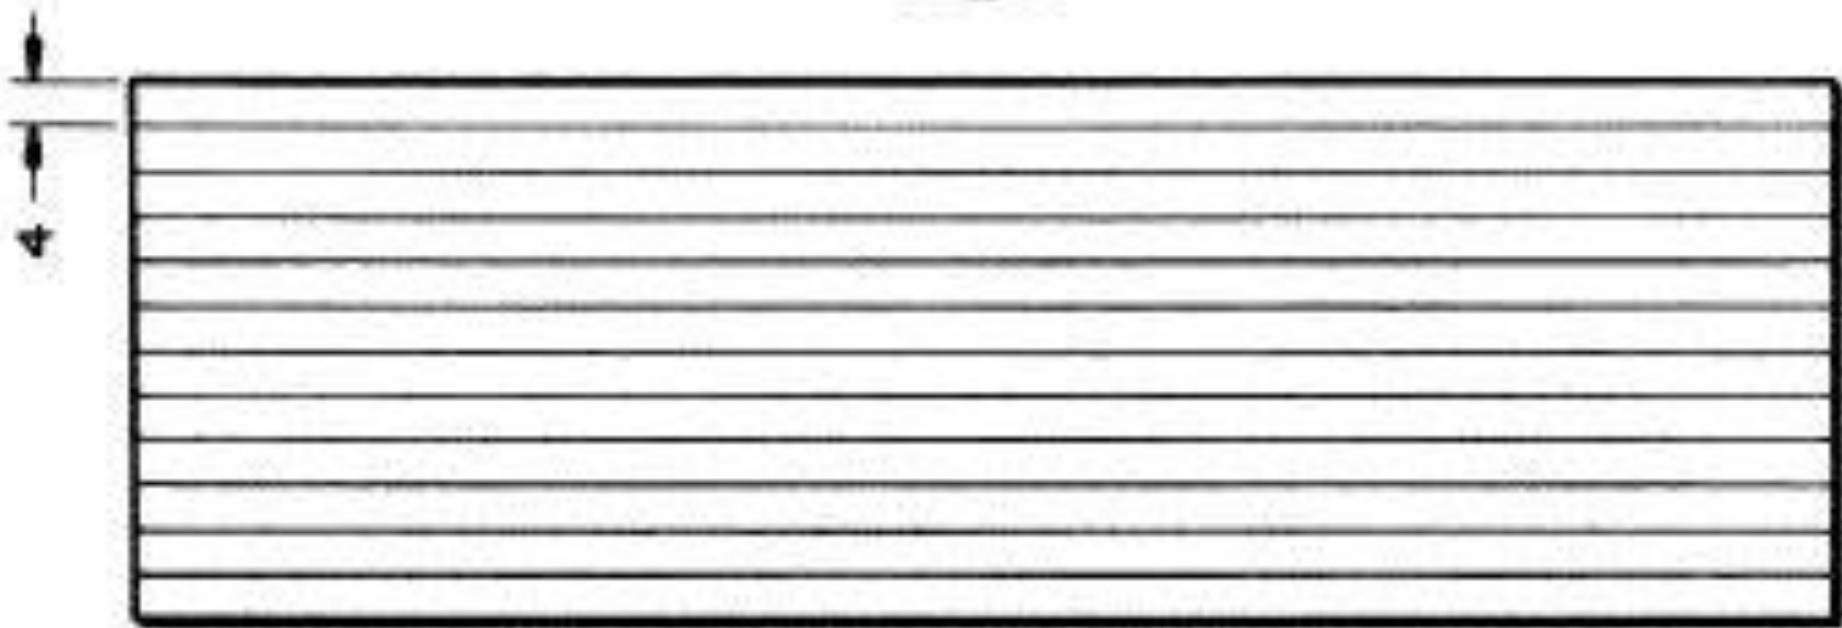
Strips per sheet with wide strip blank layout for production in a cut-off die.
